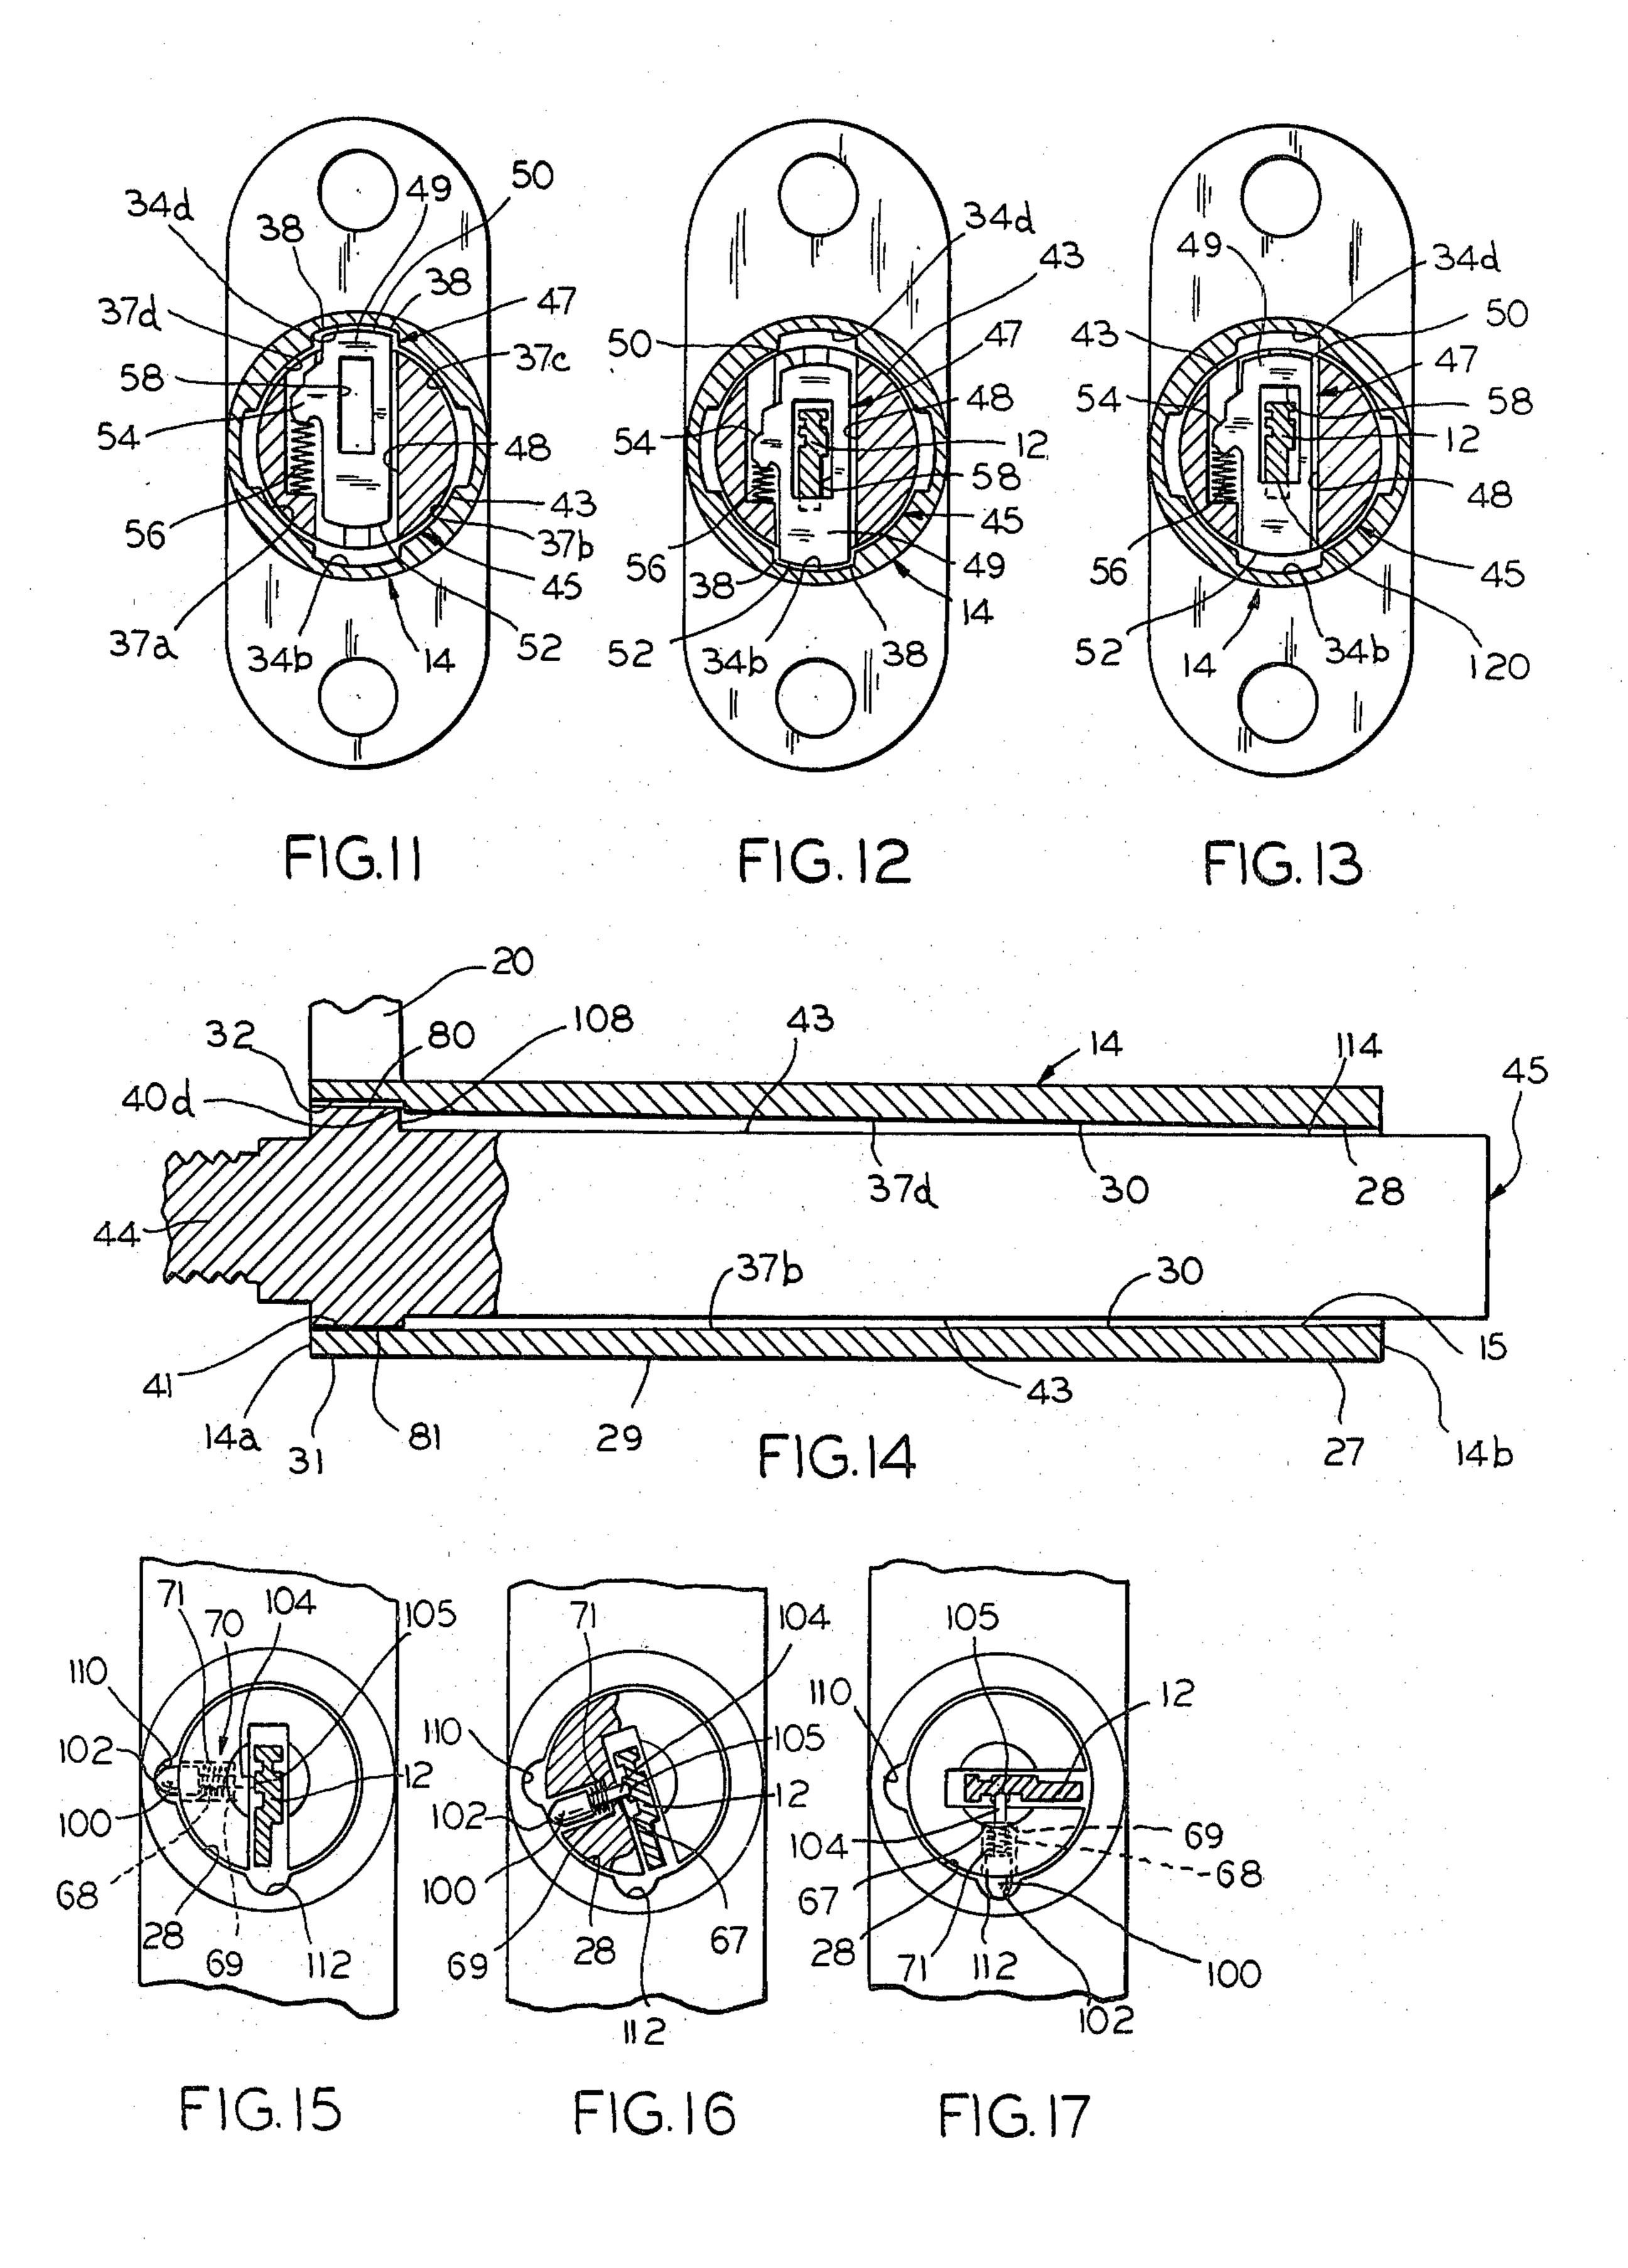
PLATE TUMBLER-TYPE CYLINDER LOCK MECHANISM
